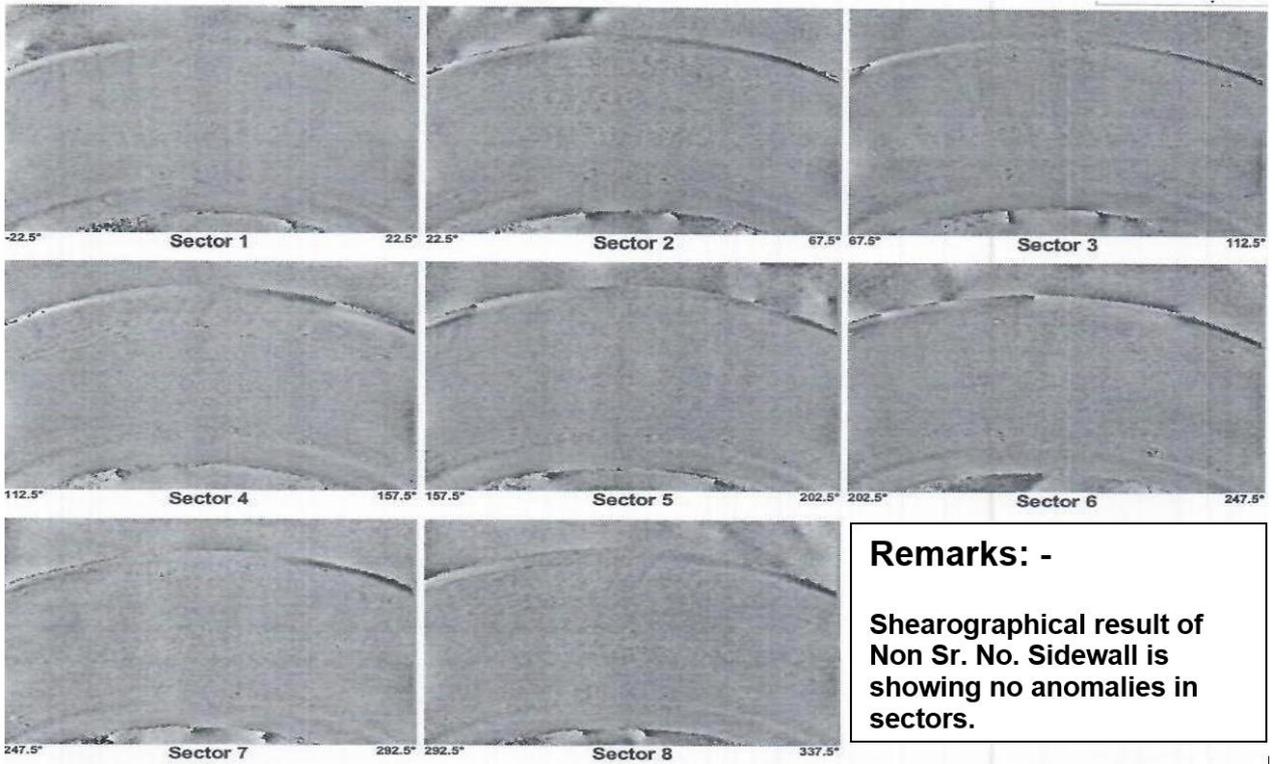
Non sr. no. Sidewall (Tyre Sr.# 7355S236)
